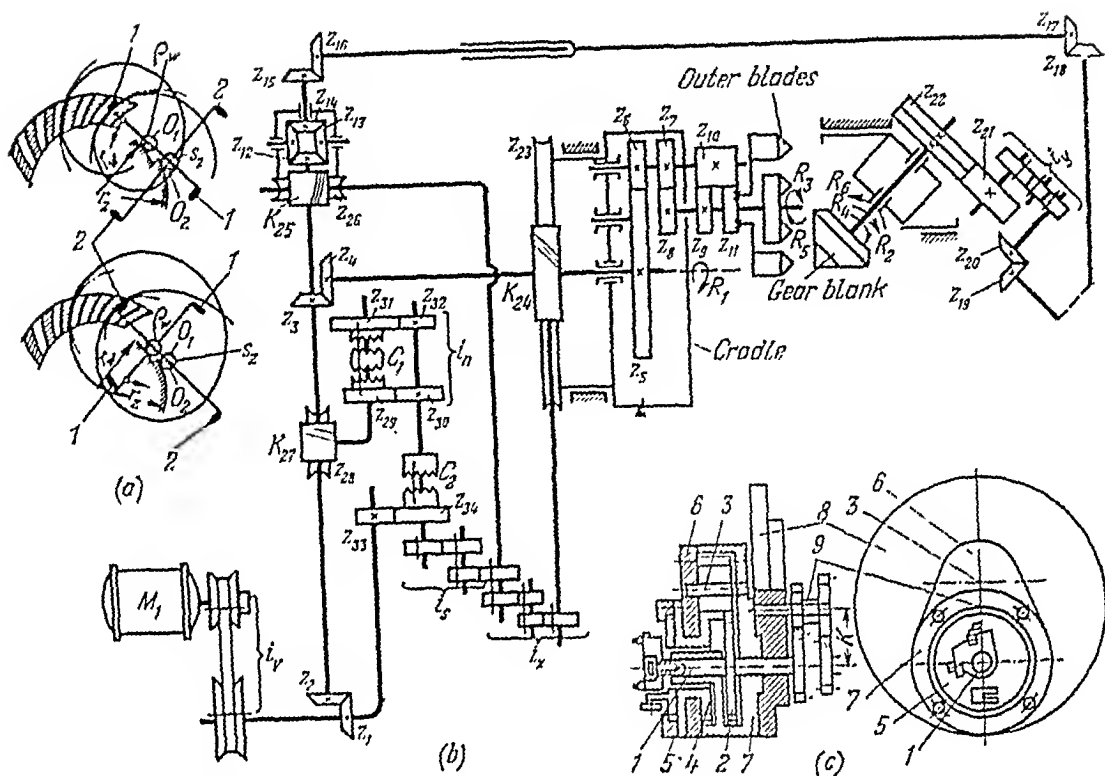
Kinematic diagram of the spiral bevel gear generator, model K41A (Klingenberg Co., FRG) for cutting curved-tooth bevel gears
